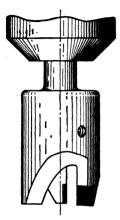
Hollow mill for turning a cylindrical surface and performing a facing operation at the same time.
